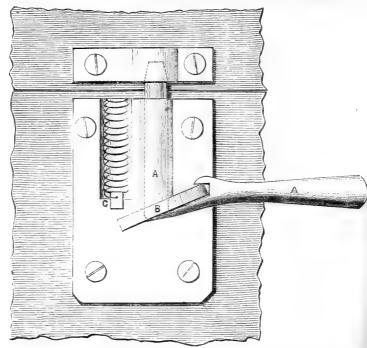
shows the position of the handle when the bolt is withdrawn. It will be seen that a spring shown at c holds the handle when unlocked. By reversing the handle and placing it in the position shown at Fig. 20 (p. 724), the end of the bolt, which is tapered, is pushed into its socket.
